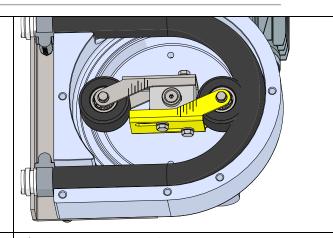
PTL9 – PTL25On the side where the roller IS pressing the hose, loosen the roller bracket mounting screws [941] and
